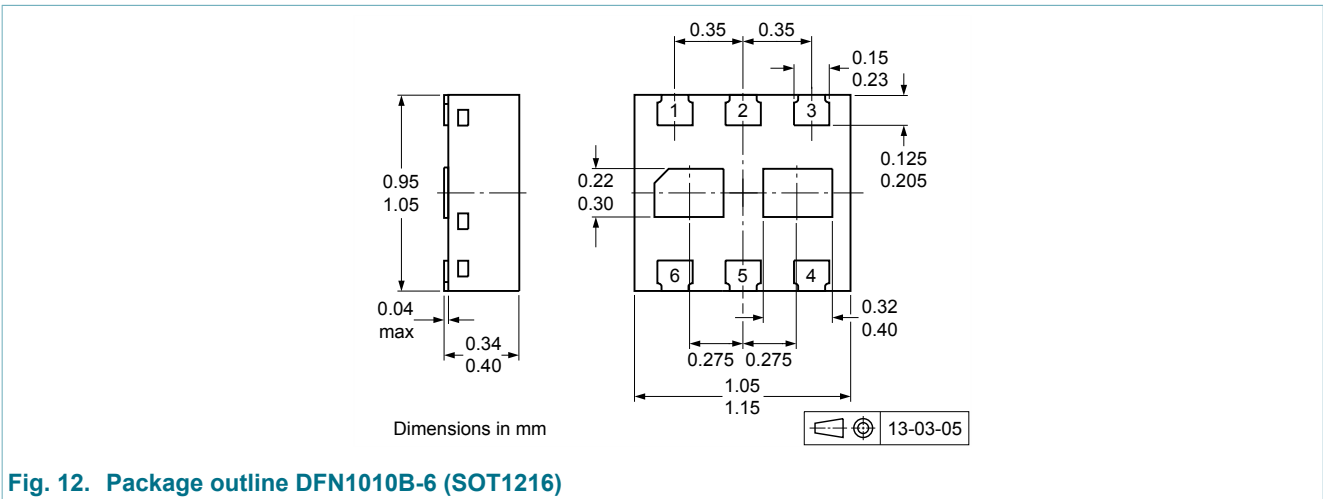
Package outline DFN1010B-6 (SOT1216)
